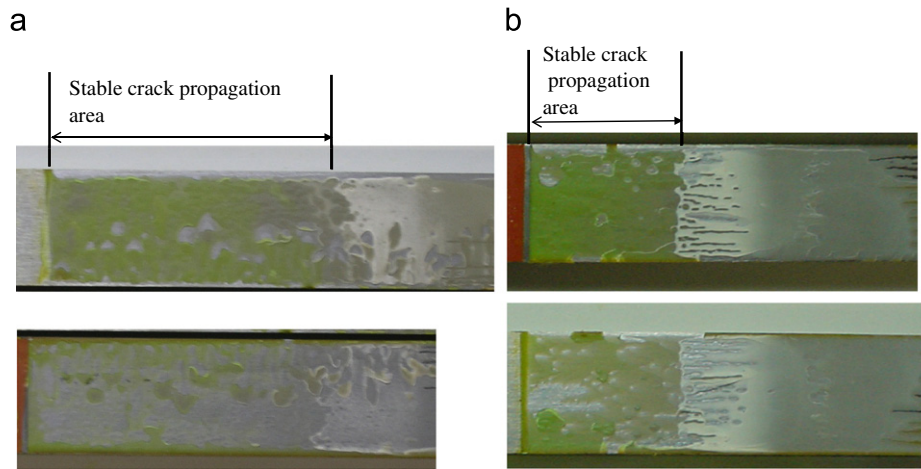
Macroscopic view of the fracture surfaces for DCB specimens: (a) CTBN-modified adhesive and (b) DCS-modified adhesive.
